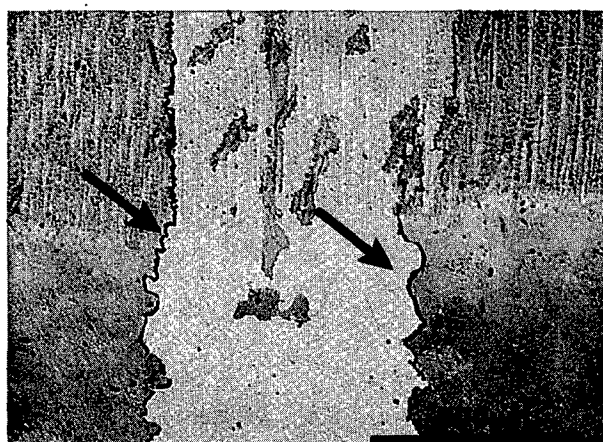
Micro-cracks formed during post-weld heat treatment on the tip of a HP blade manufactured from DS Rene 142 alloy.
